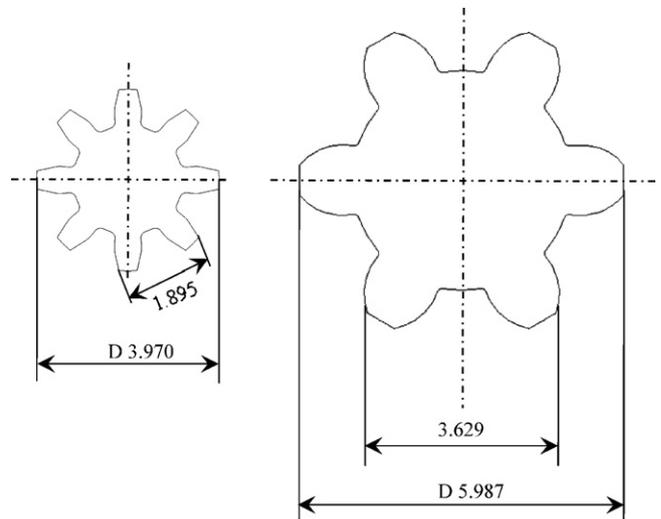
Dimensions of the mold inserts of the 4 mm and 6 mm gears.
